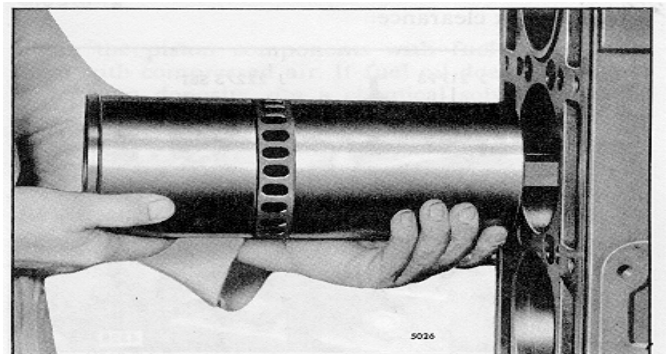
Installing Piston, Rod and Liner Assembly in Cylinder Block
